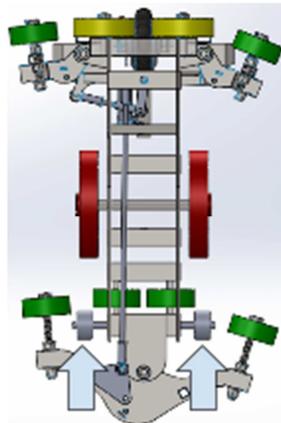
Modified design of the upstop wheel. This modified design has the upstop wheel attached above the steering mechanism.
